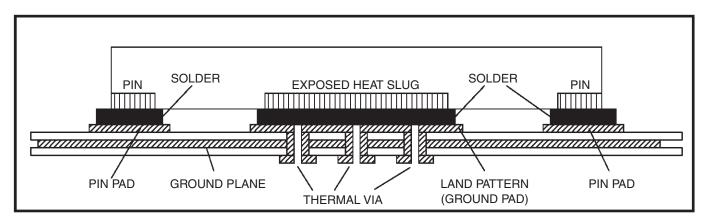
P.C. Assembly for Exposed Pad Thermal Release Path – Side View (drawing not to scale)
